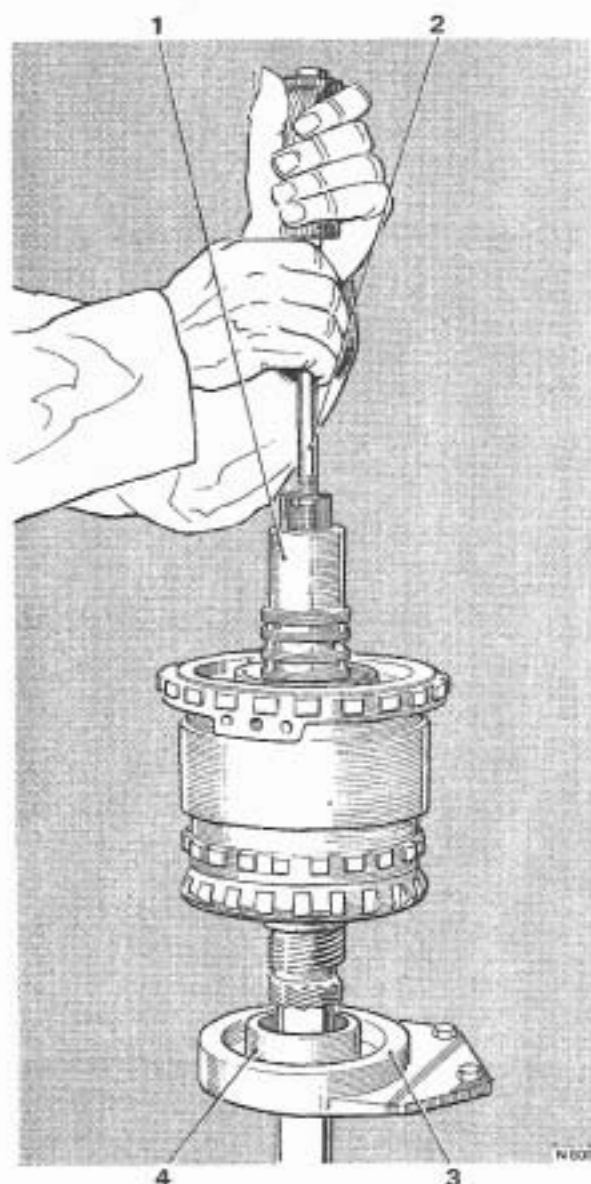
FITTING THE GEAR UNIT INTO THE HOLDING FIXTURE
